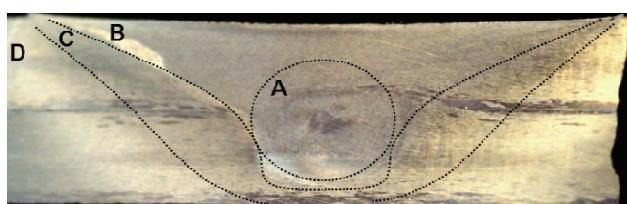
Cross section of a typical lap joint section (AA2024-T4).
